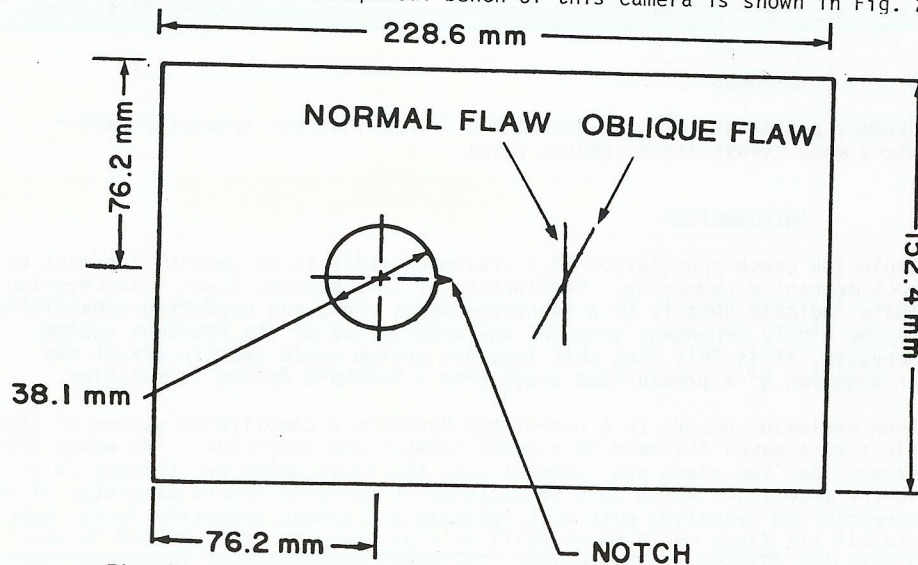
Model Geometry Representing a Large Flaw in a Monolithic Specimen
